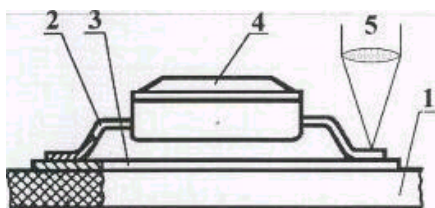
Diagram of laser soldering of the IC planar leads to the PCB Fig. 2 Cross section of the soldered joint
